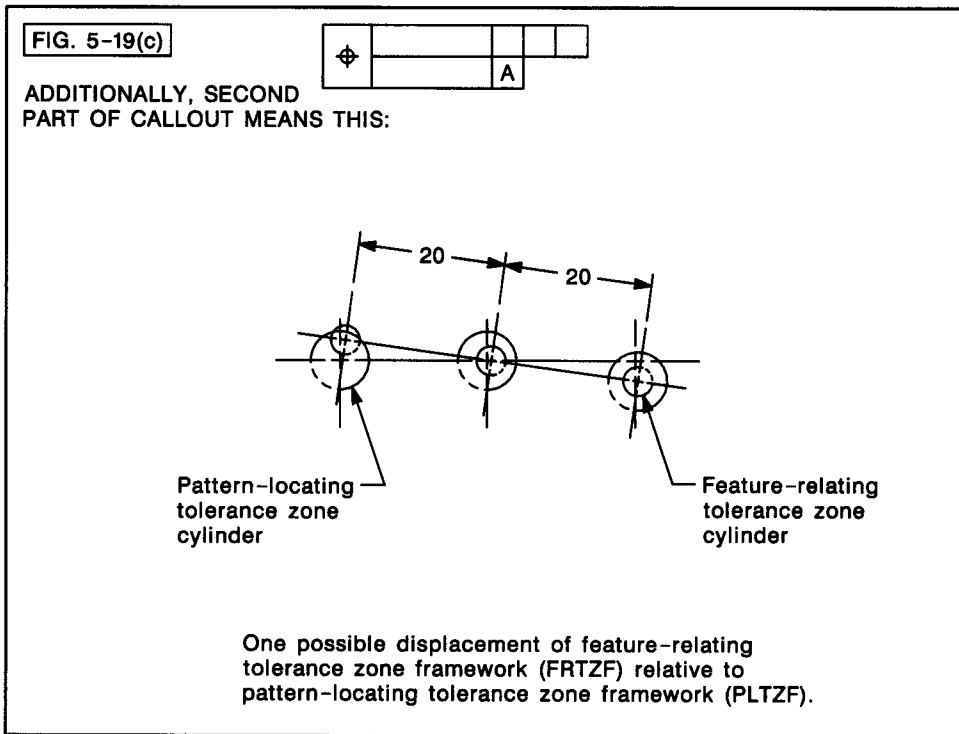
HOLE PATTERNS LOCATED BY COMPOSITE POSITIONAL TOLERANCING (CONT'D)
